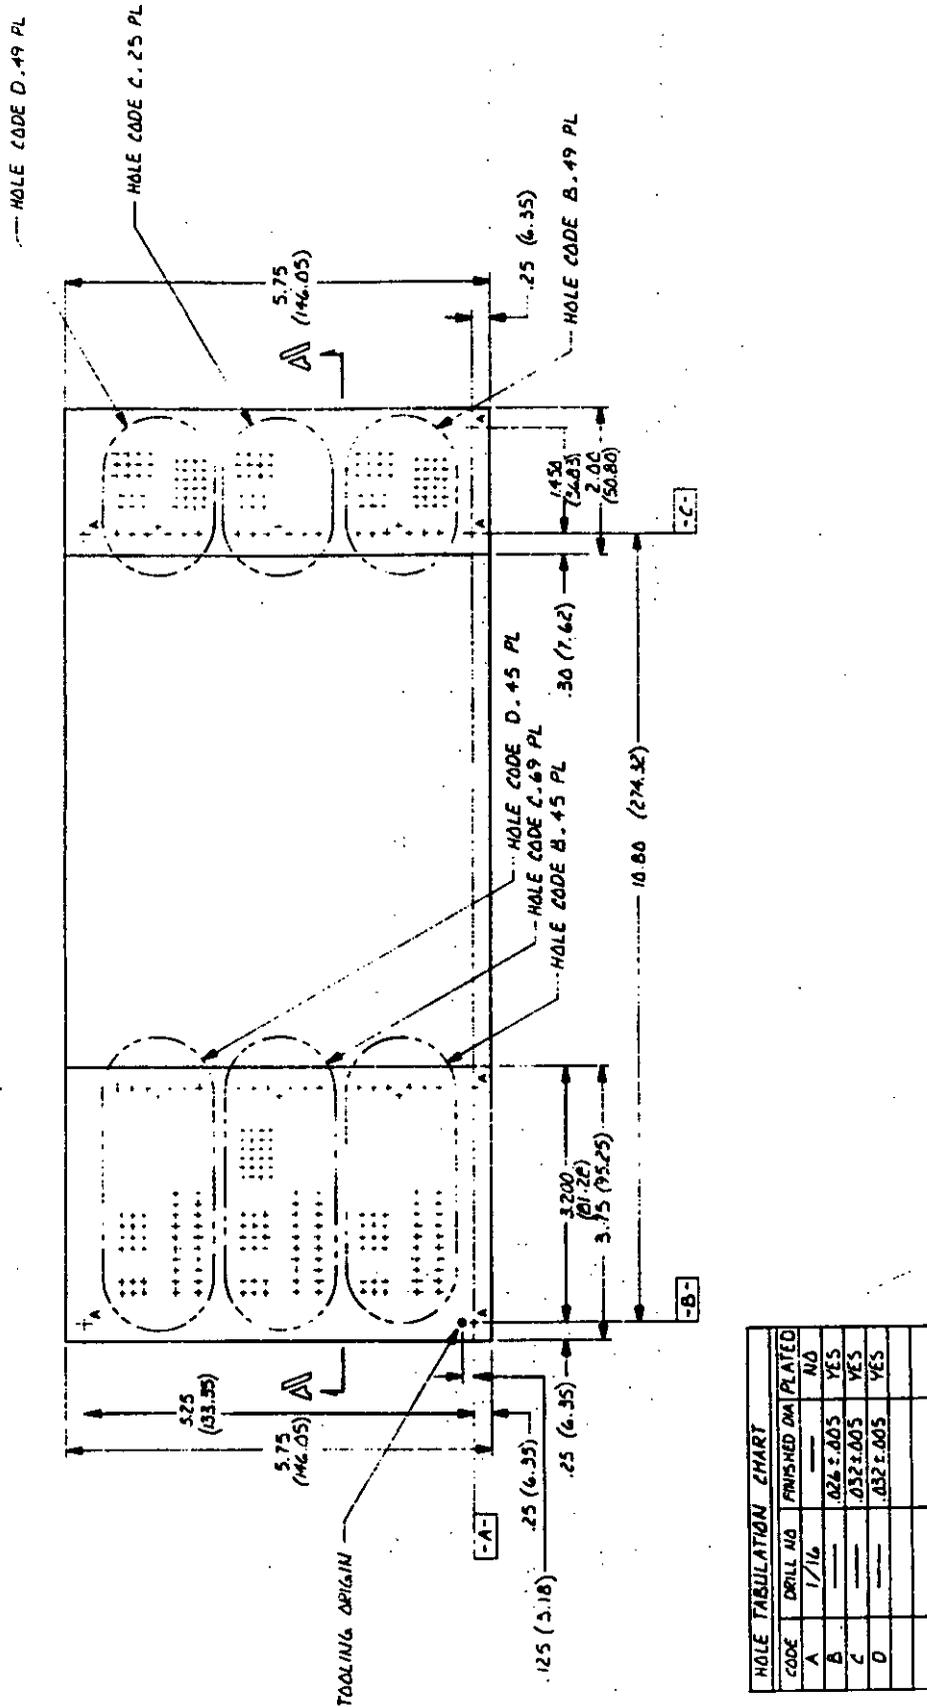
Multilayer test specimen IPC-A-29 - Continued.
